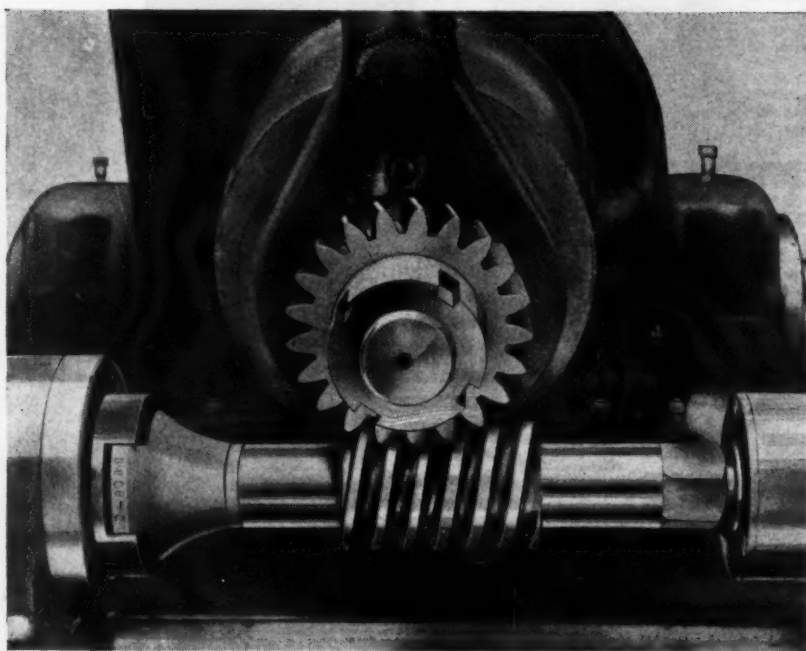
Serrated Shaving Tool Finishing an External Spur Gear by the Crossed-axes Shaving Method
